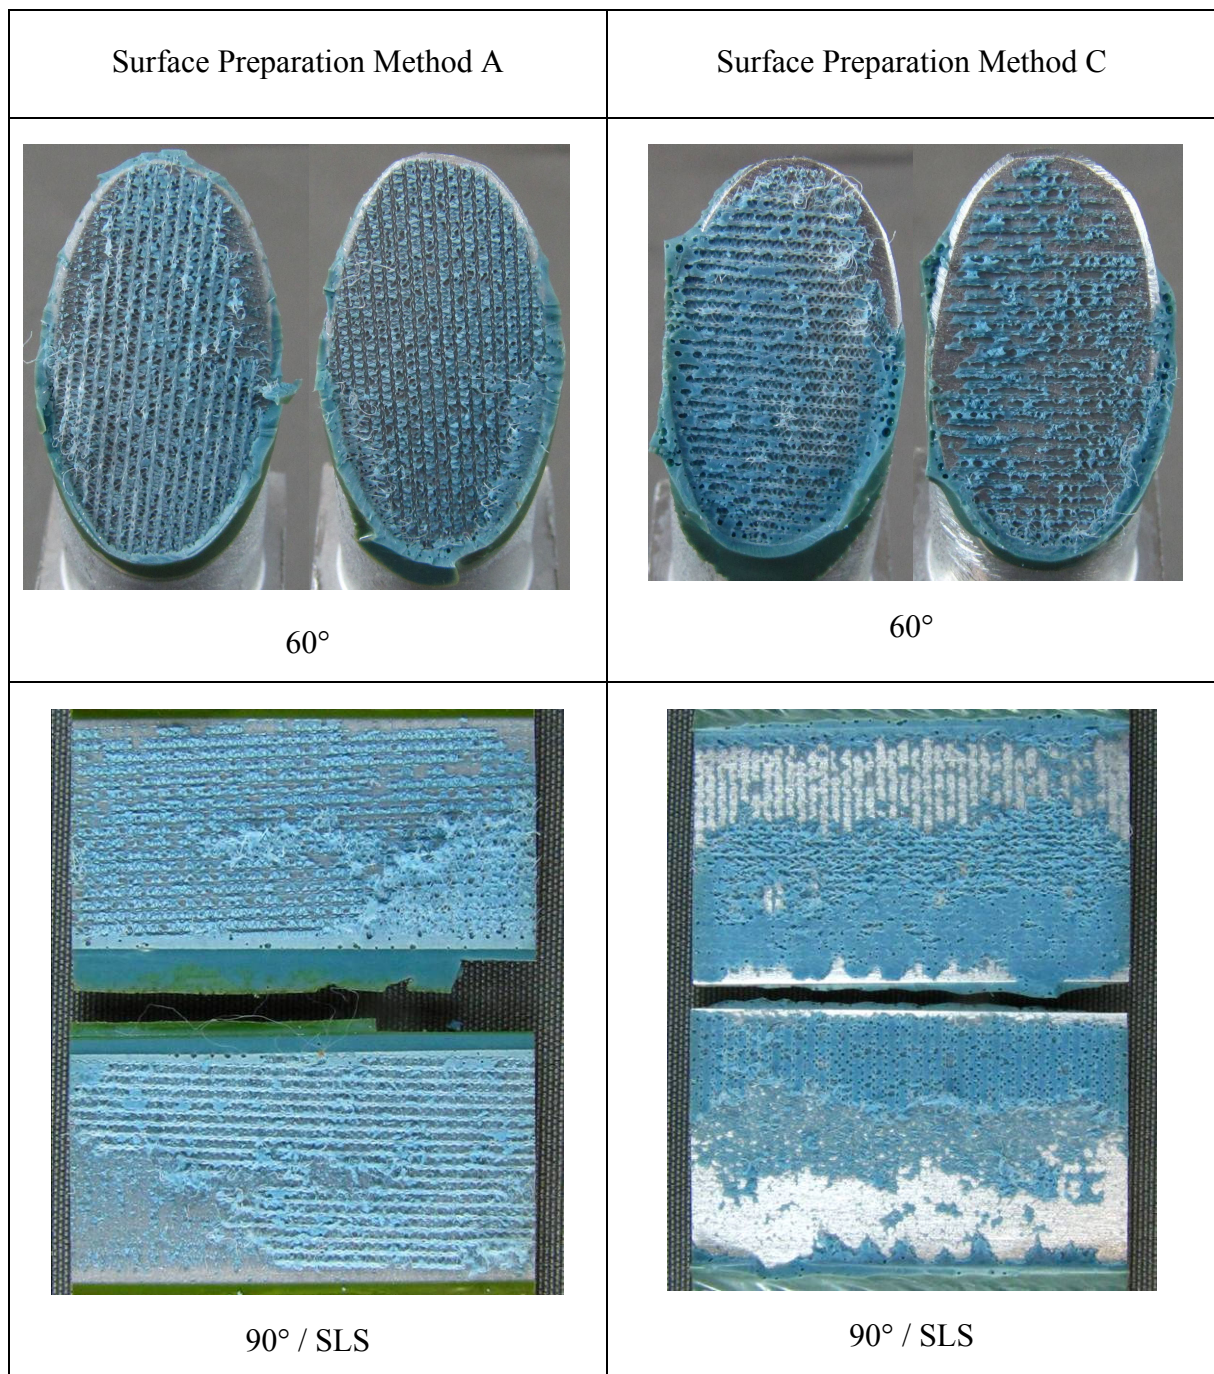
Typical fracture surfaces of the 60° conditioned scarf joints and single lap-shear joints
